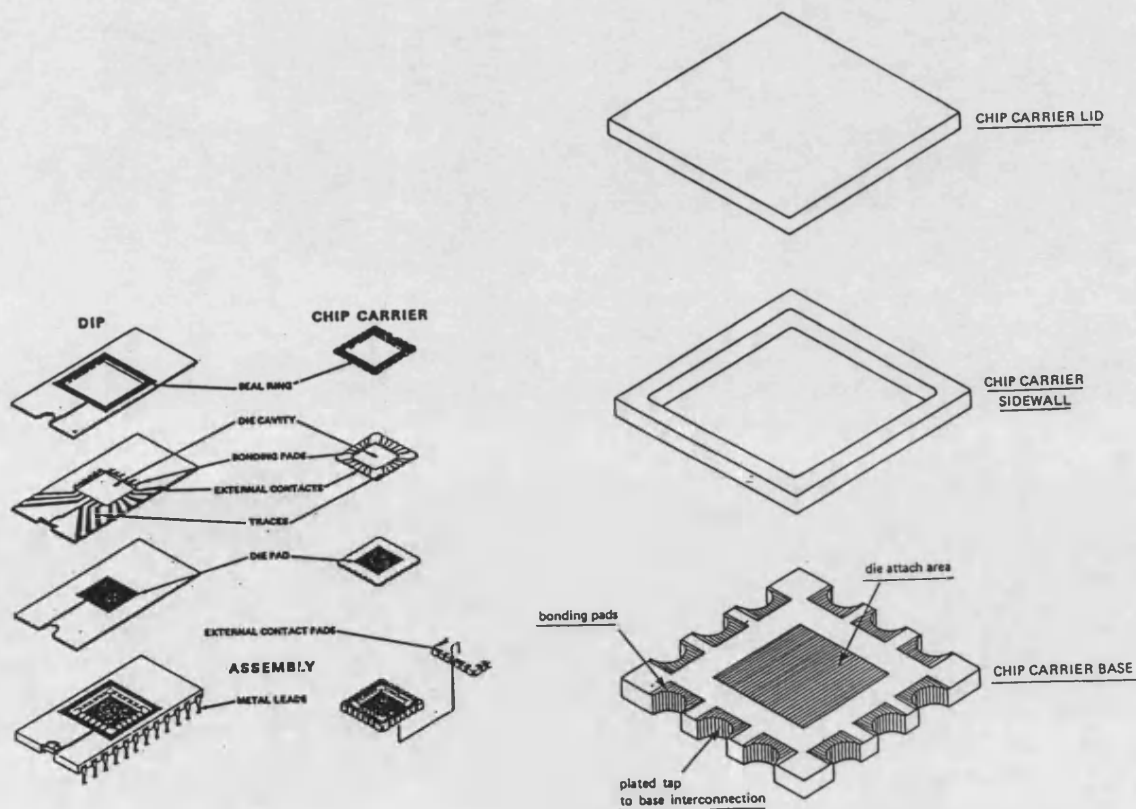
EXPLODED VIEW OF CHIP CARRIER AND DIP
